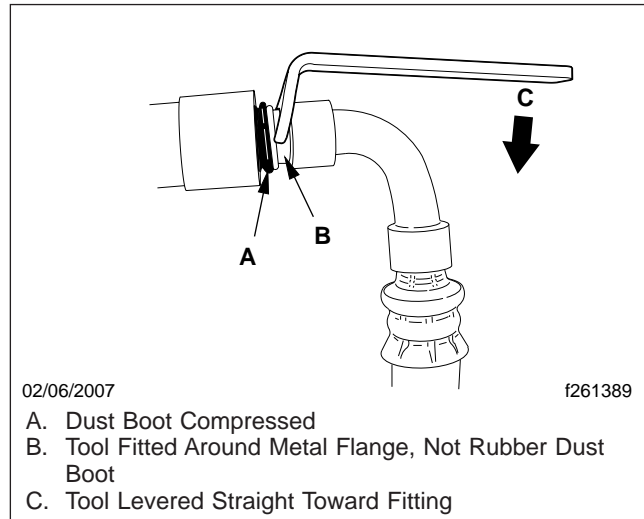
, Quick-Disconnect Fitting Removal with Kent-Moore Tool J-48548
